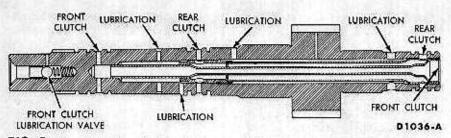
Cross-Section of Primary Sun Gear Shaft
